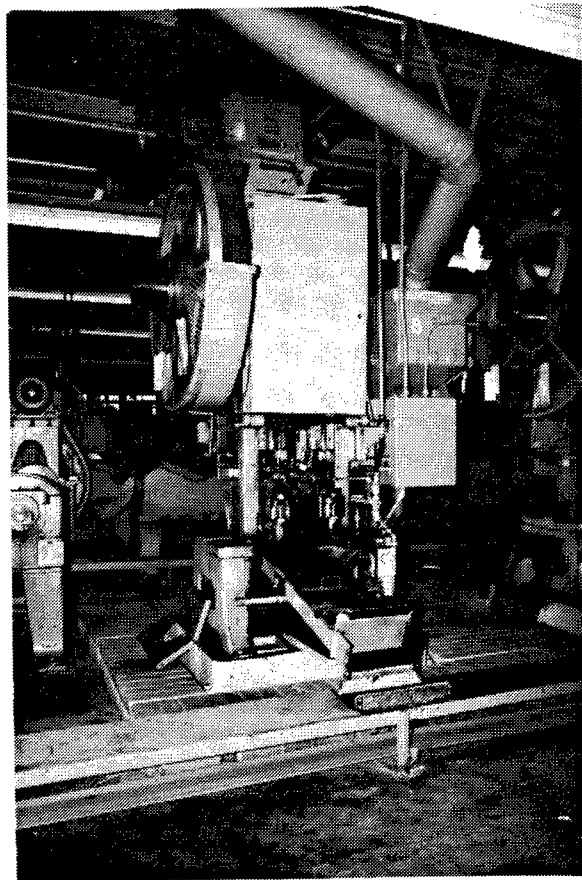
Building 102: Third Case Draw manufactured in 1942 by the E.W. Bliss Company.
